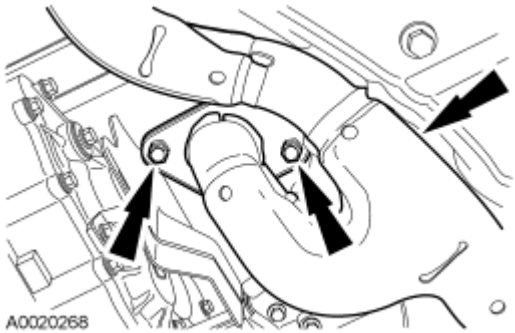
Rear Exhaust Pipe Flange & Nuts
